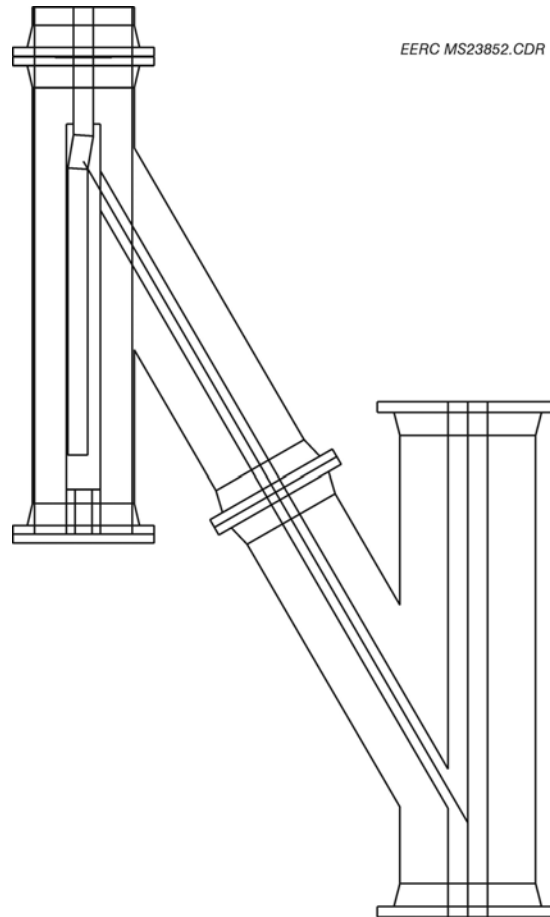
Drawing of seal pot loop seal on bottom of the dipleg.
